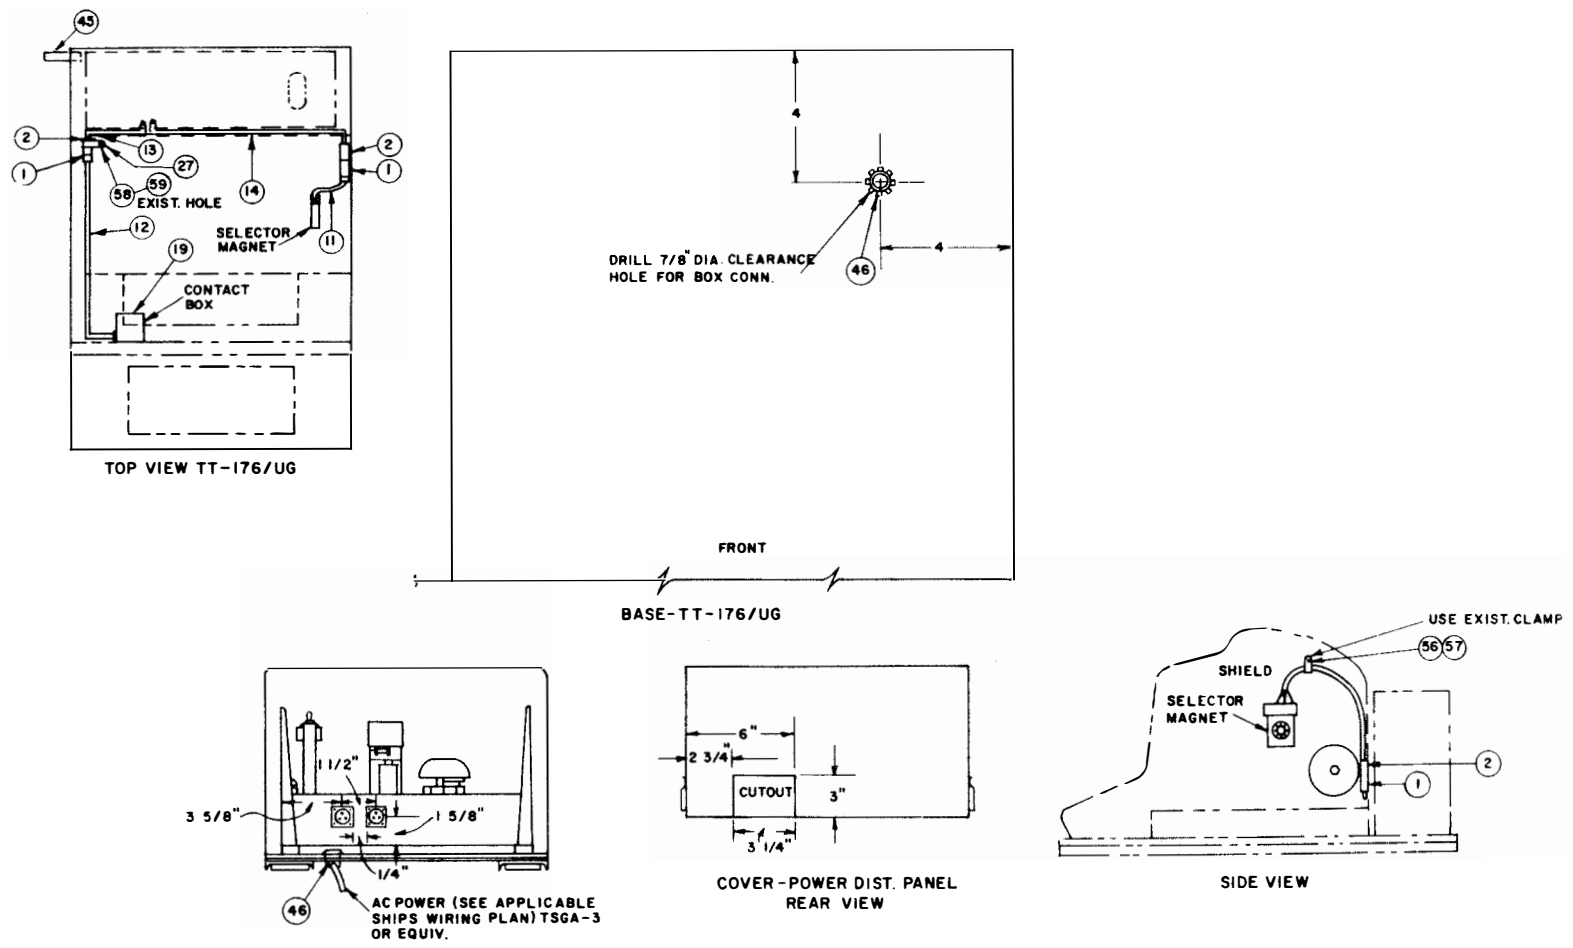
TT-176/UG Installation Drawing (Part 2)
